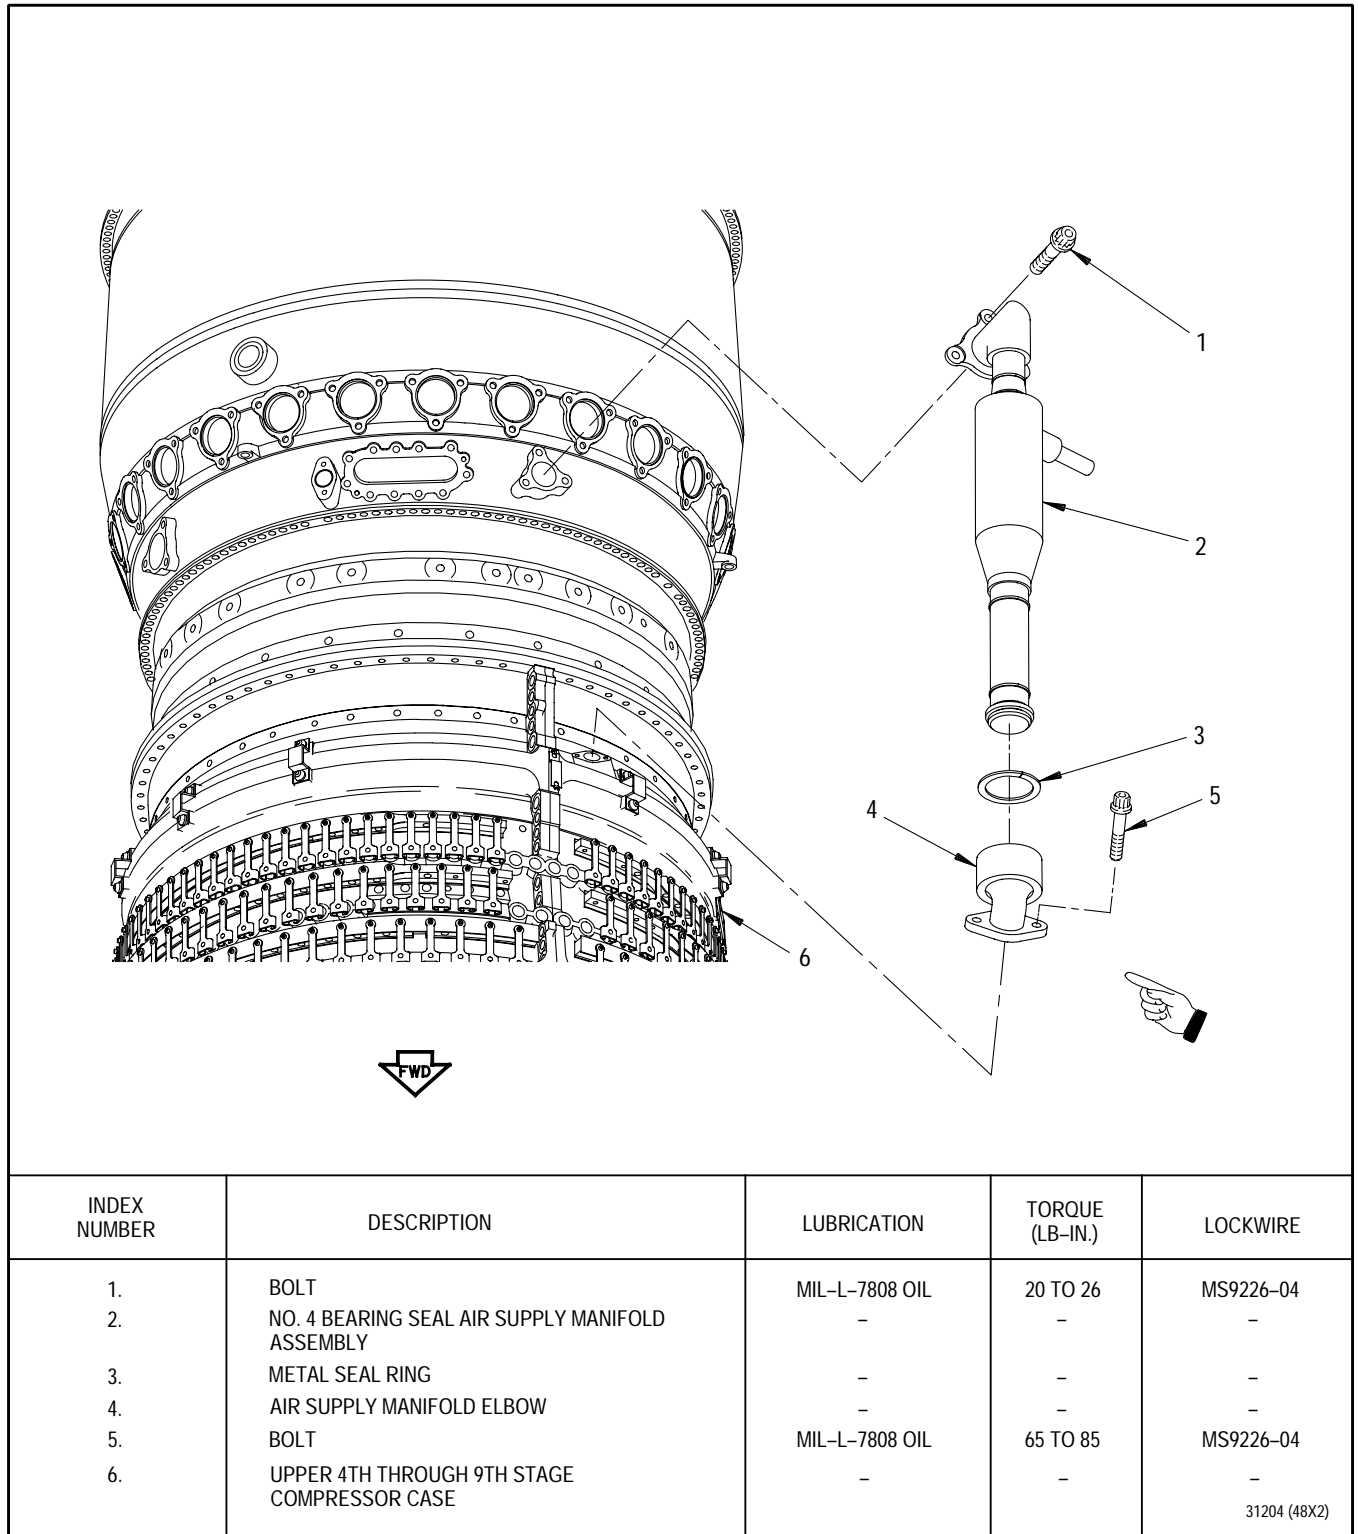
No. 4 Bearing Seal Air Supply Manifold - Installation
